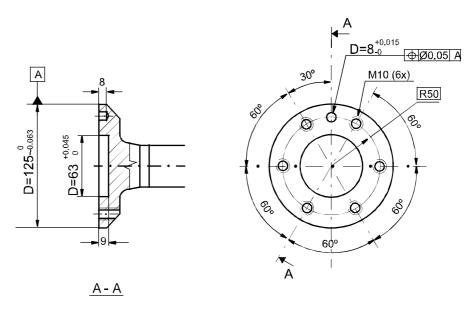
The mechanical interface, mounting flange (dimensions in mm).
